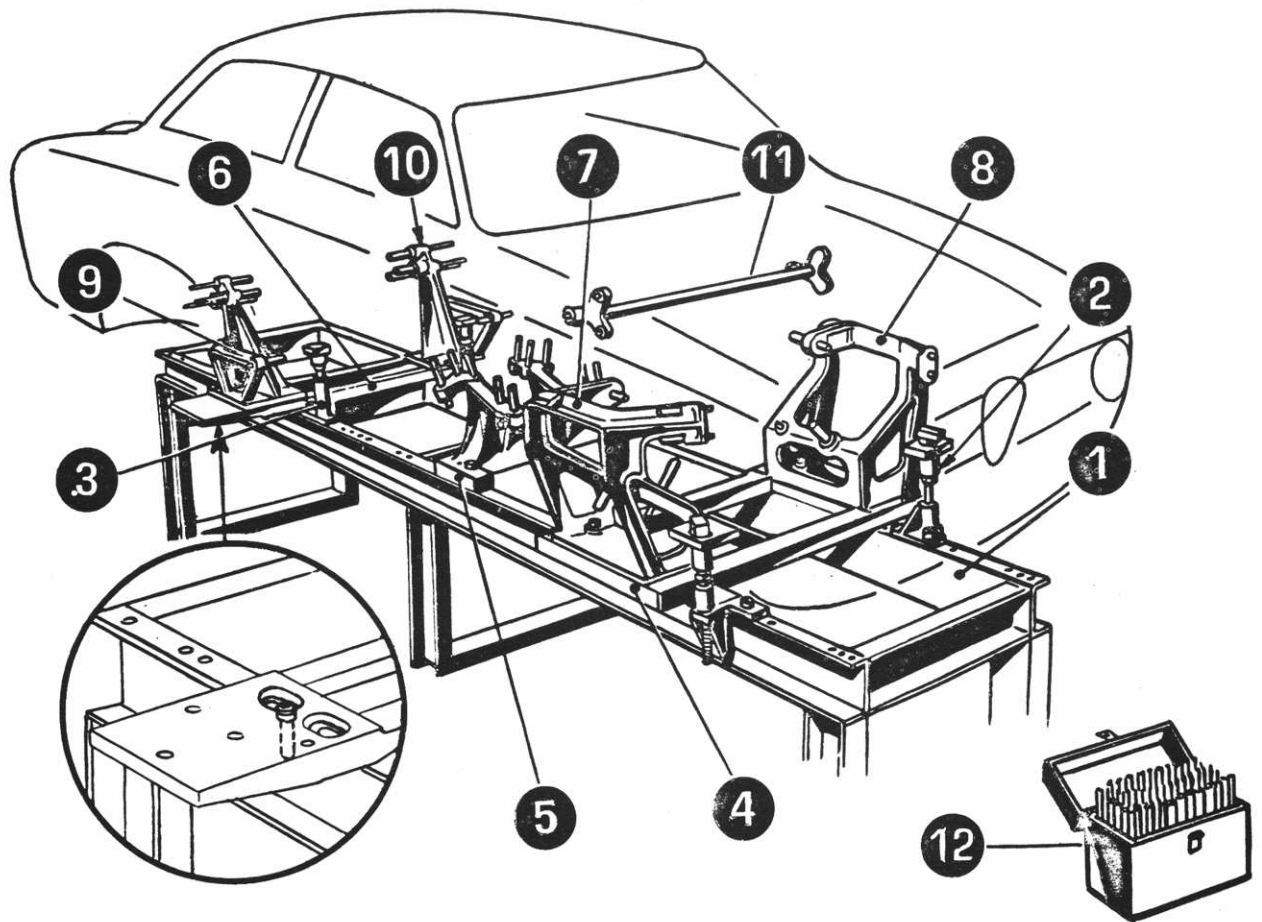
GIULIA Sprint GT CHASSIS CHECKING LAYOUT
